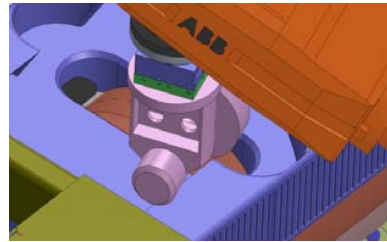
UFC Grinding (or Milling)- using Robot “B”
